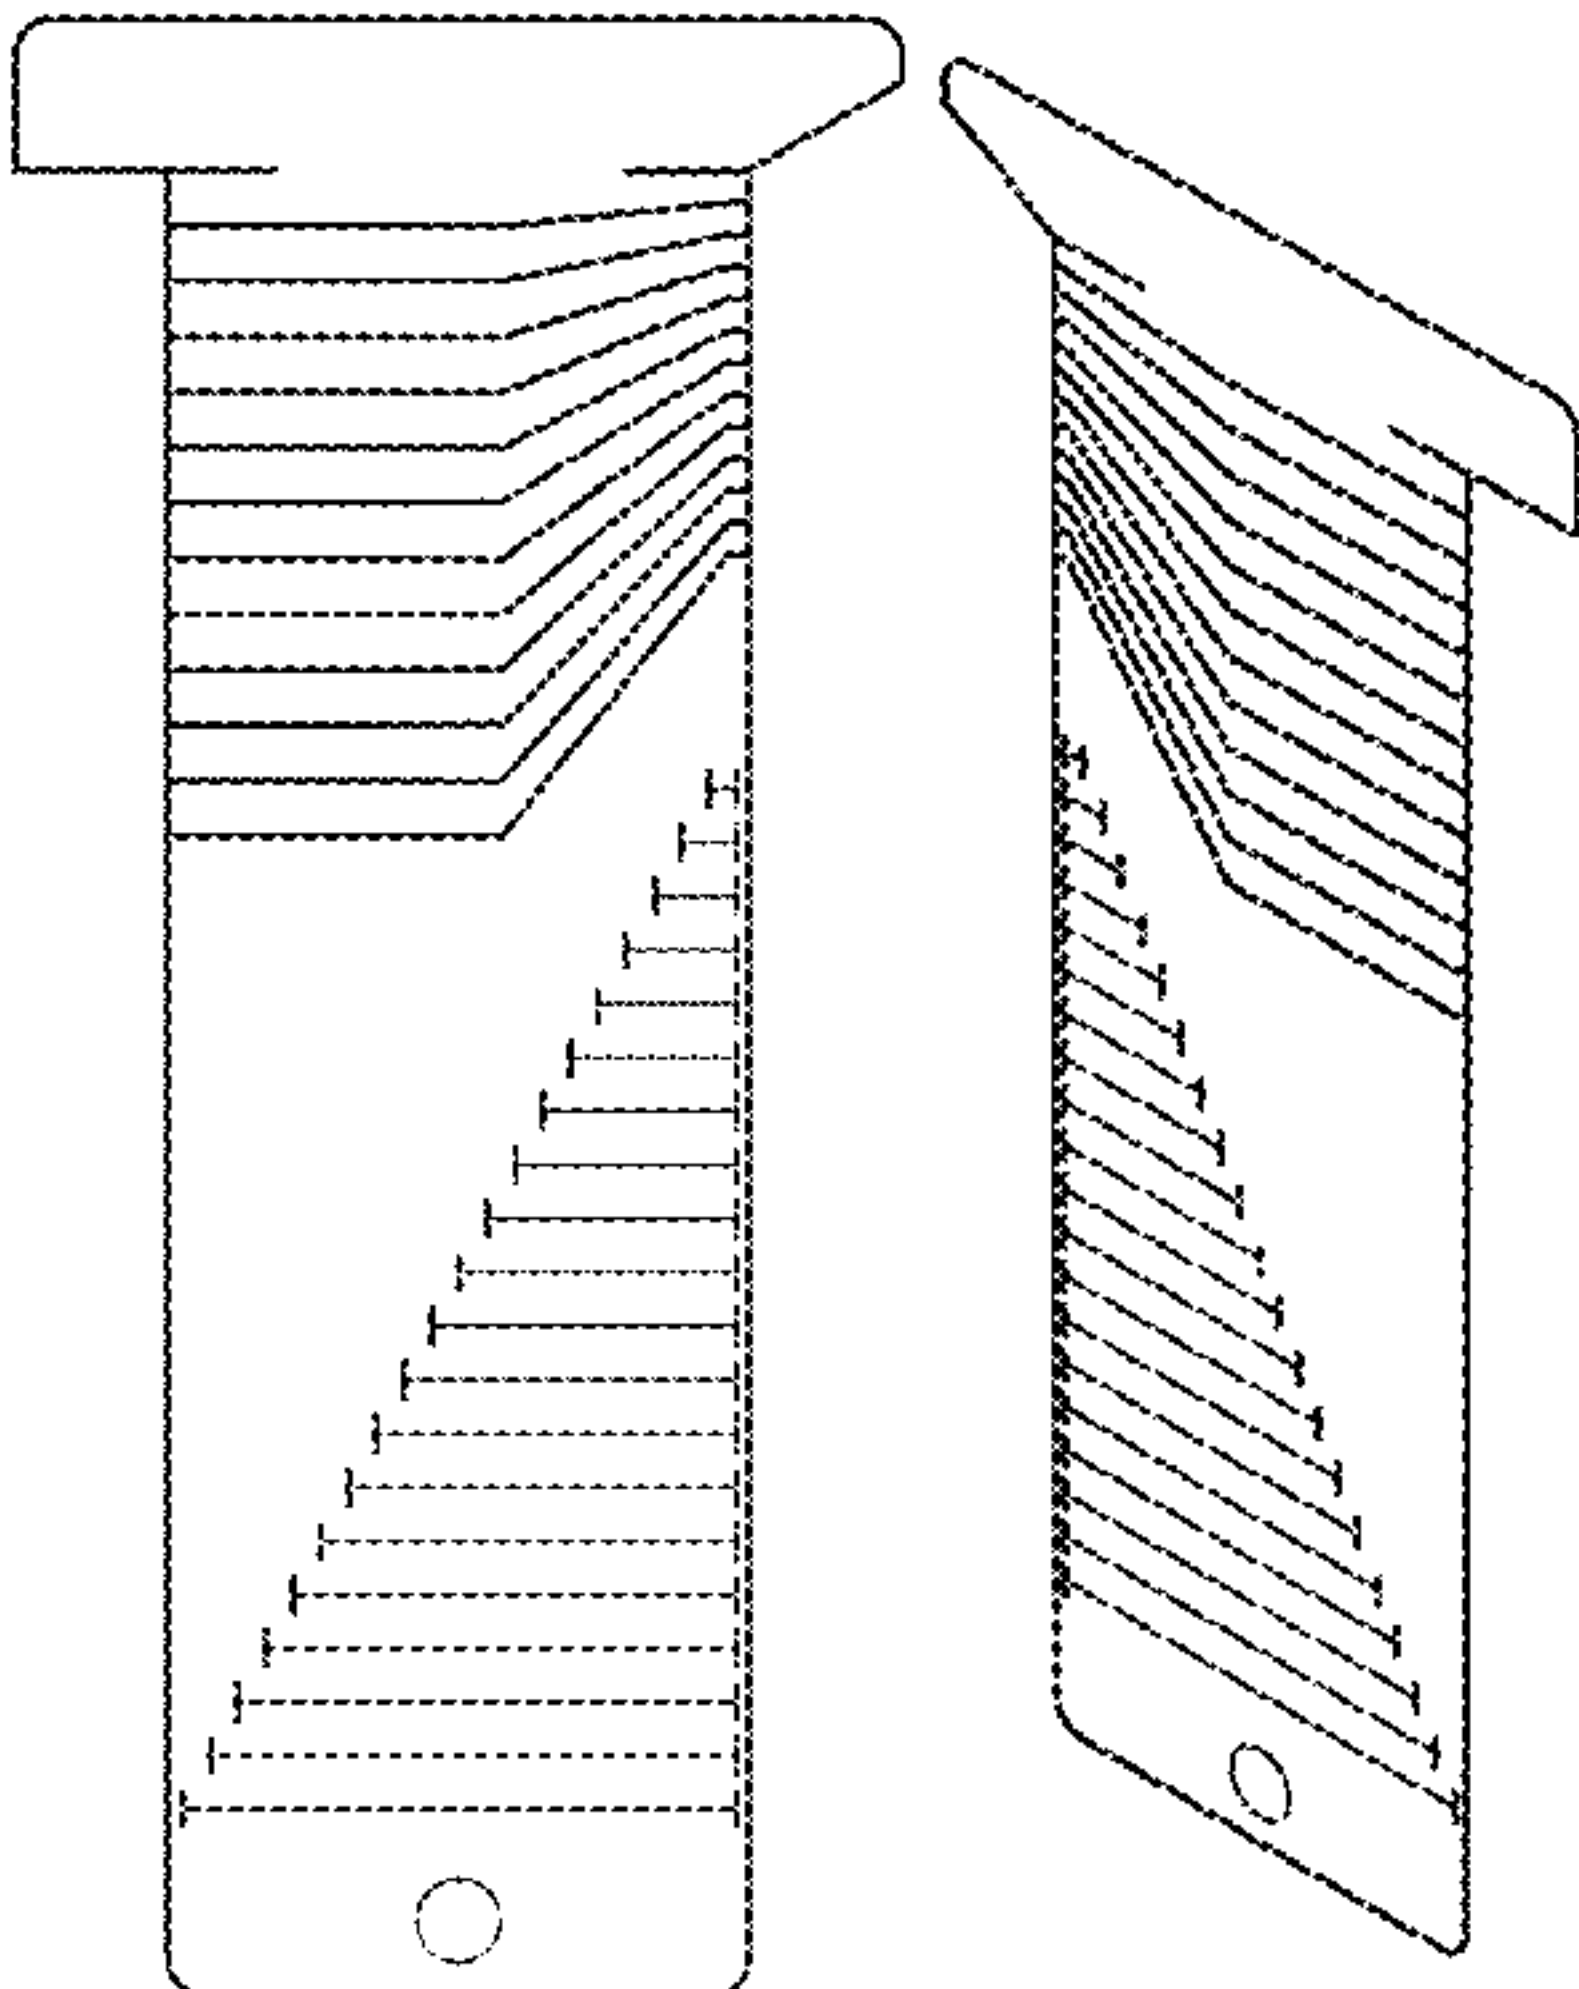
is a top view of the nut and stud size gauge shown in FIG. 16 of the drawings;
